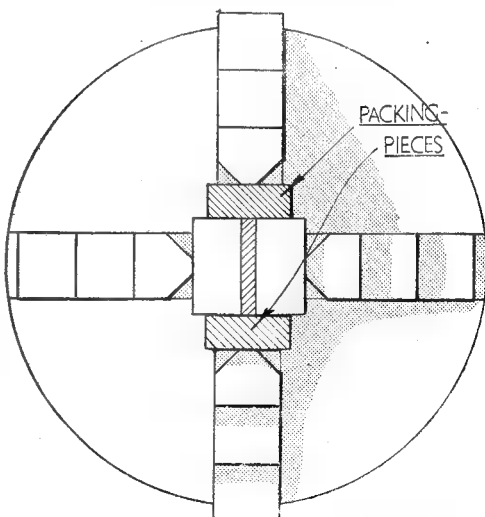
Mounting the work in the four-jaw chuck for machining the end of the shank
